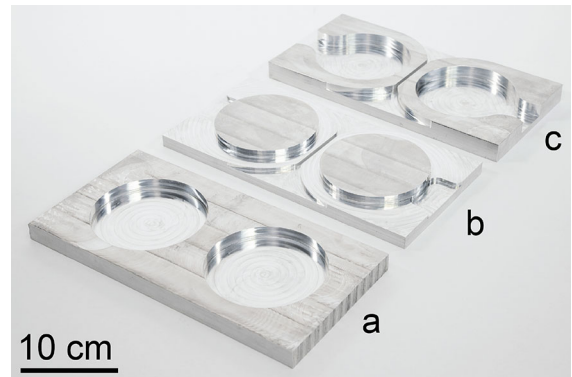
6061 aluminum fixtures used during mechanical testing. A Bottom fixture used in the Crush configuration. B Top fixture used in Configuration 2. C Bottom fixture used in the Spanning Configuration
